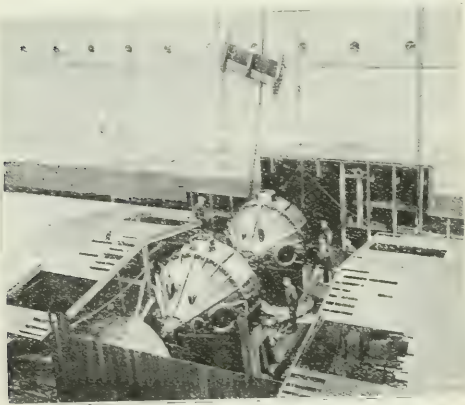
STABILISER FOR A 10,000-TON STEAMER.
